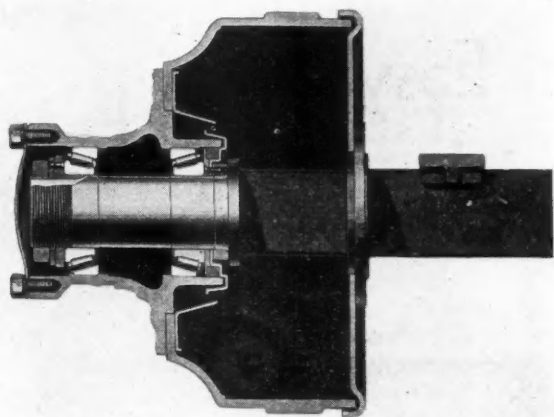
Section through hub and brake drum of trailer axle + + + + +
